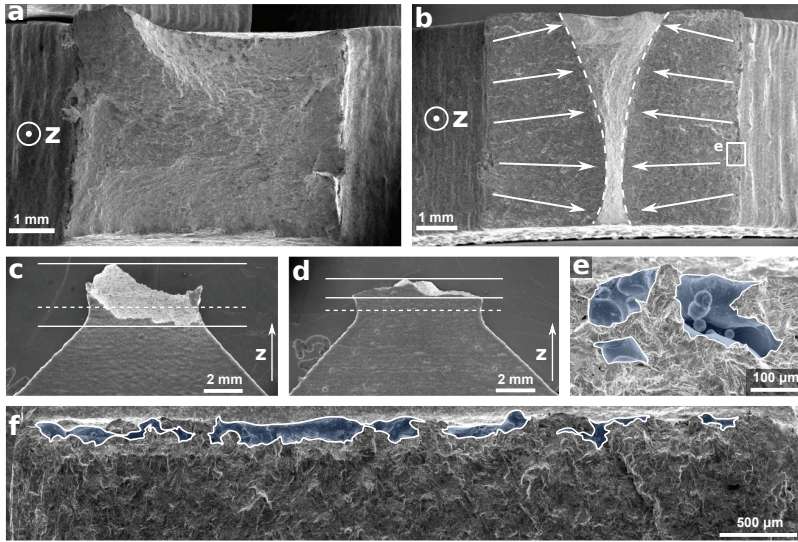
Fracture surfaces of notched Inconel 718 specimens failing under static (a,c) and fatigue loading (b,d,e,f).
